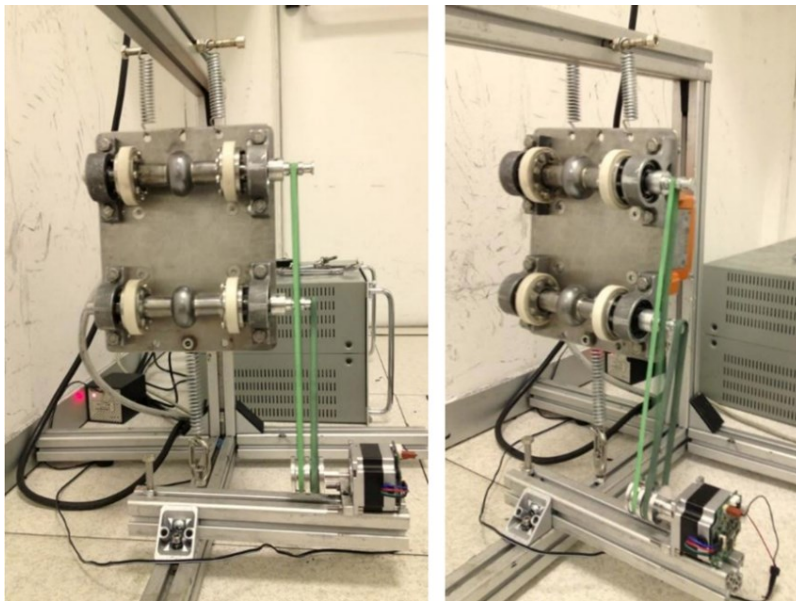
A photo view of the first generation vibro-tumbling machine built LNL [96]
